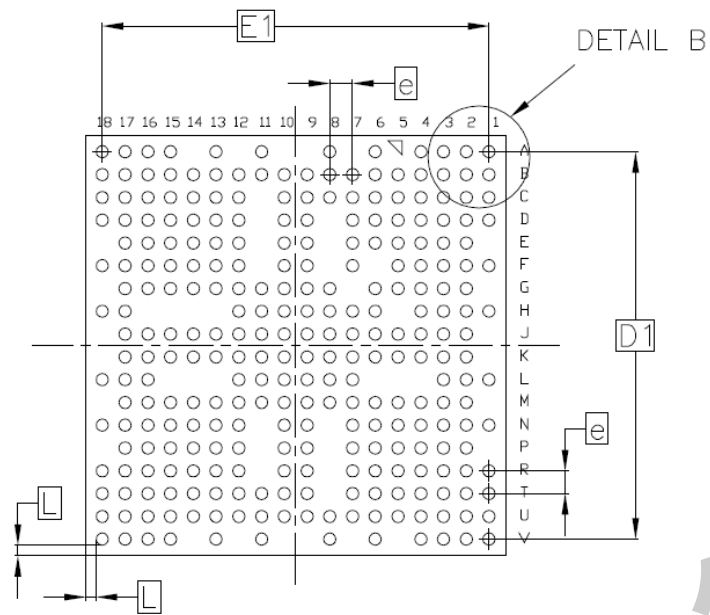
2. 12 mm x 12 mm Package Bottom View
